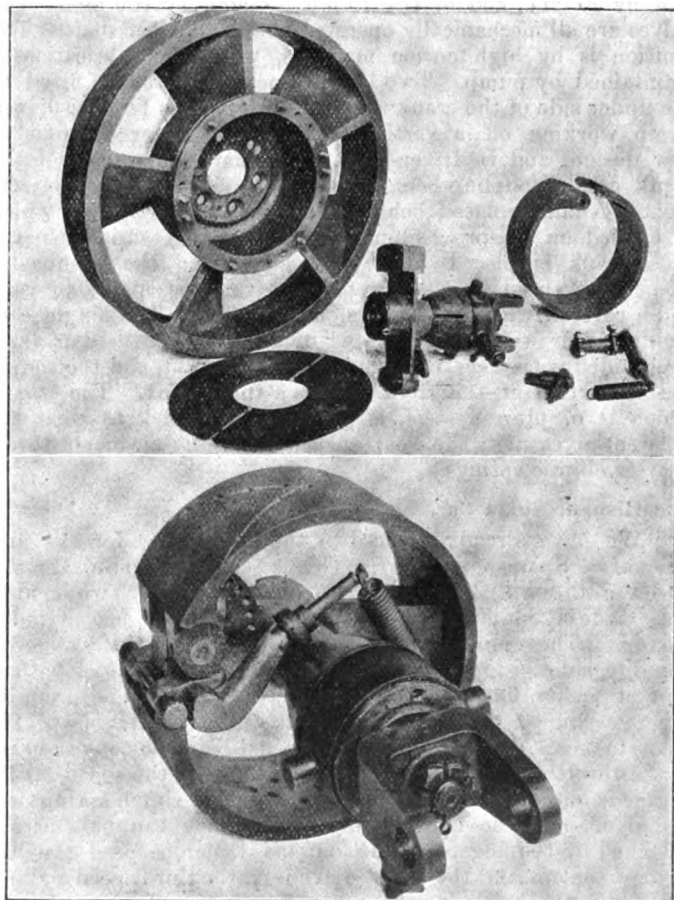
Detail View of the De Dietrich Metal-to-metal Clutch.
